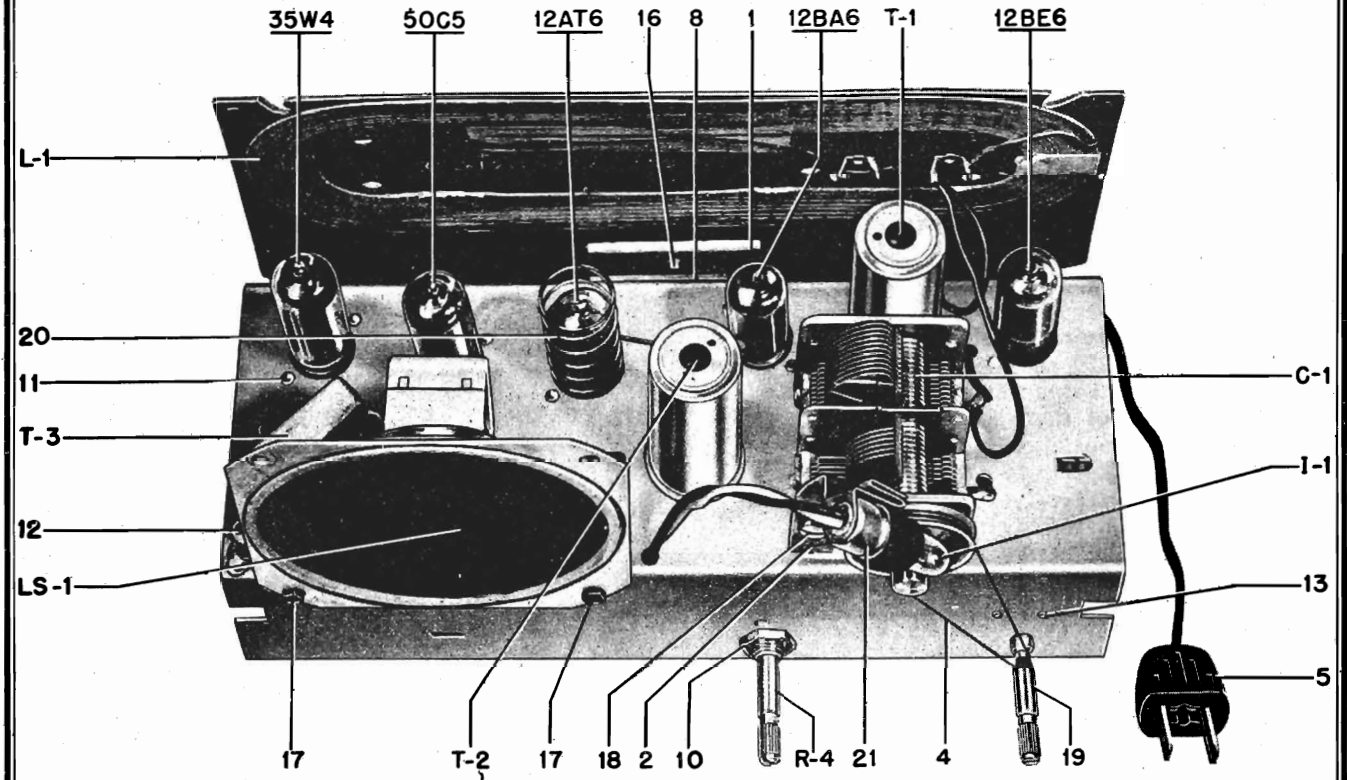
CHASSIS PARTS LOCATION - TOP VIEW
